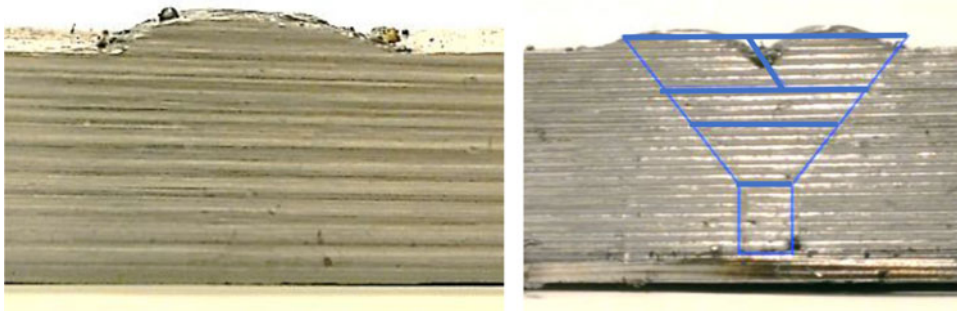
Multi-layer weld on a sample thick plate with 10-mm thickness, Evensen [10].
